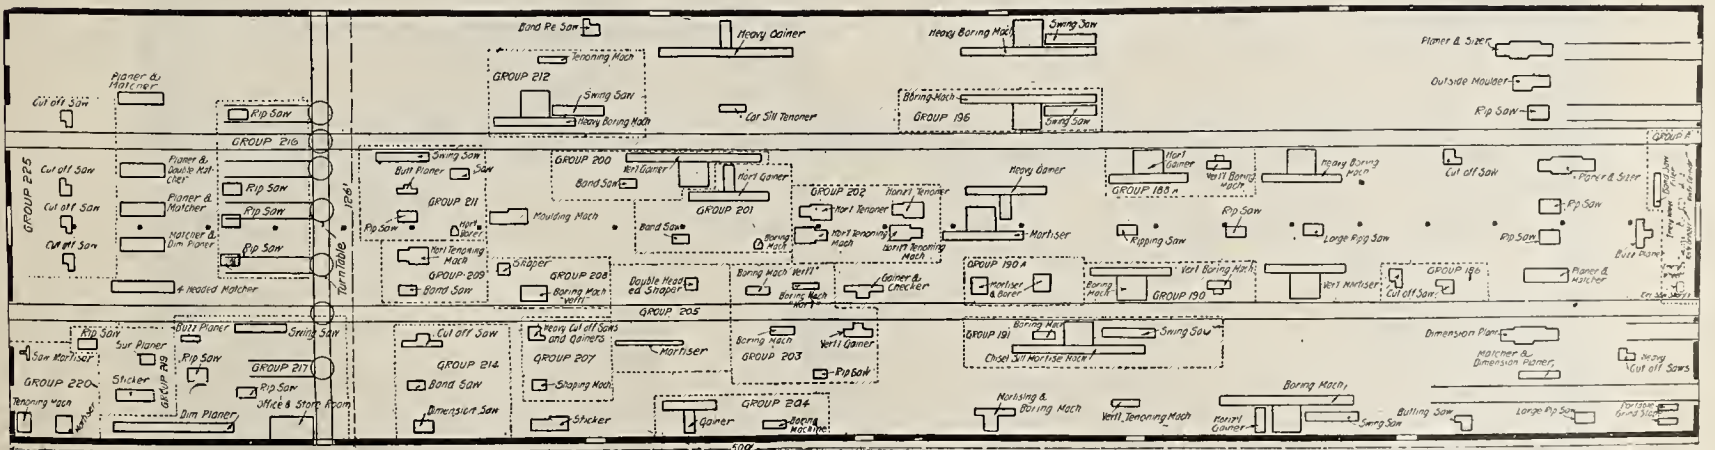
FLOOR PLAN OF WOOD MILL C. P. R. SHOPS.
